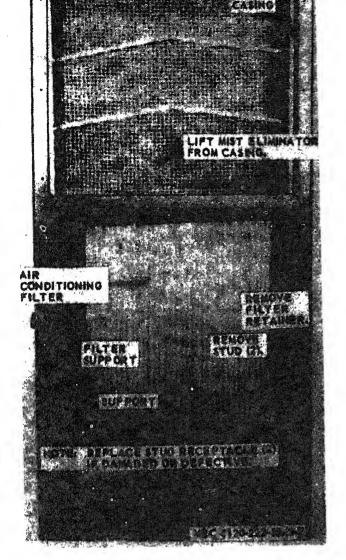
Mist eliminator and air conditioning filter, removal and installation.
